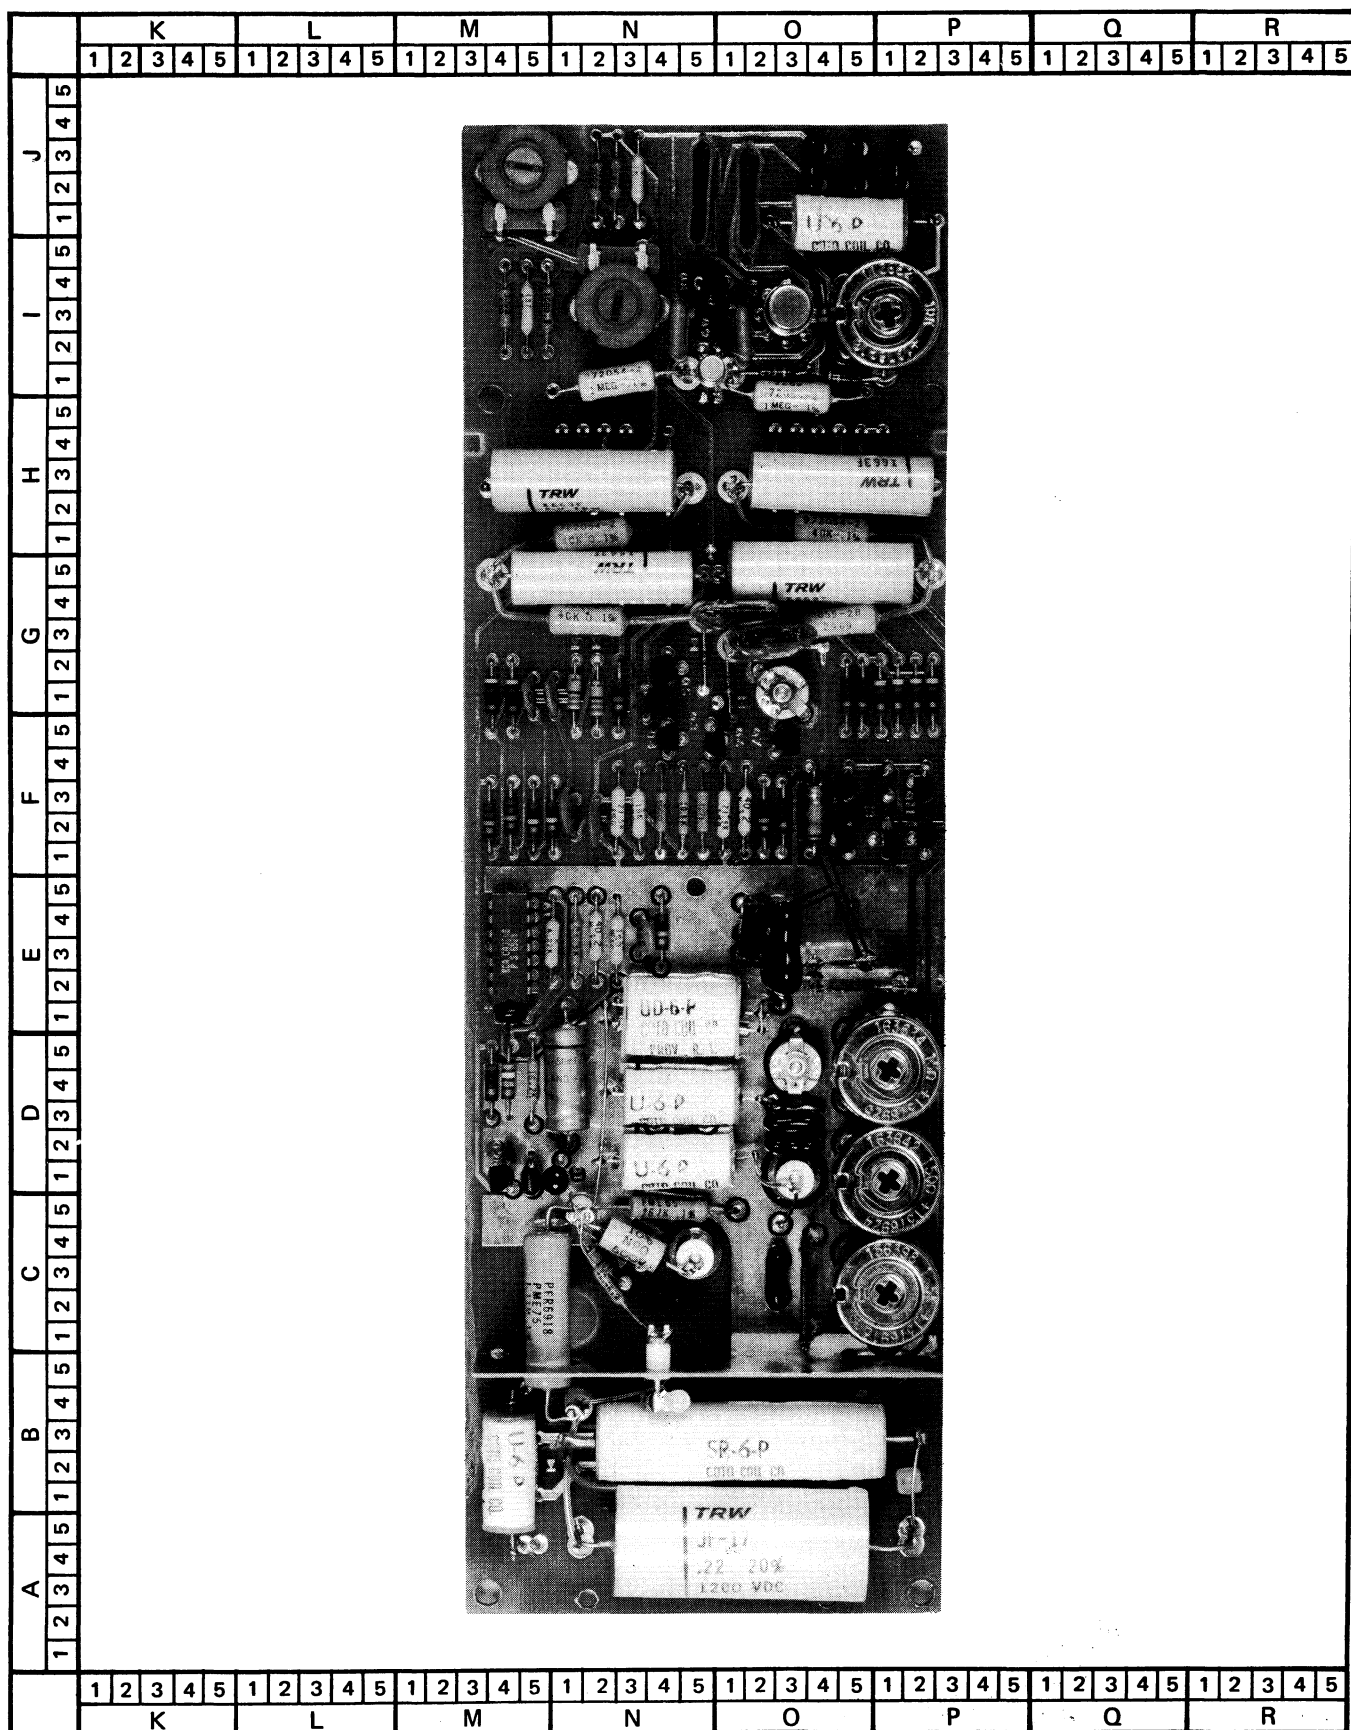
AC CONVERTER P/C ASSEMBLY
